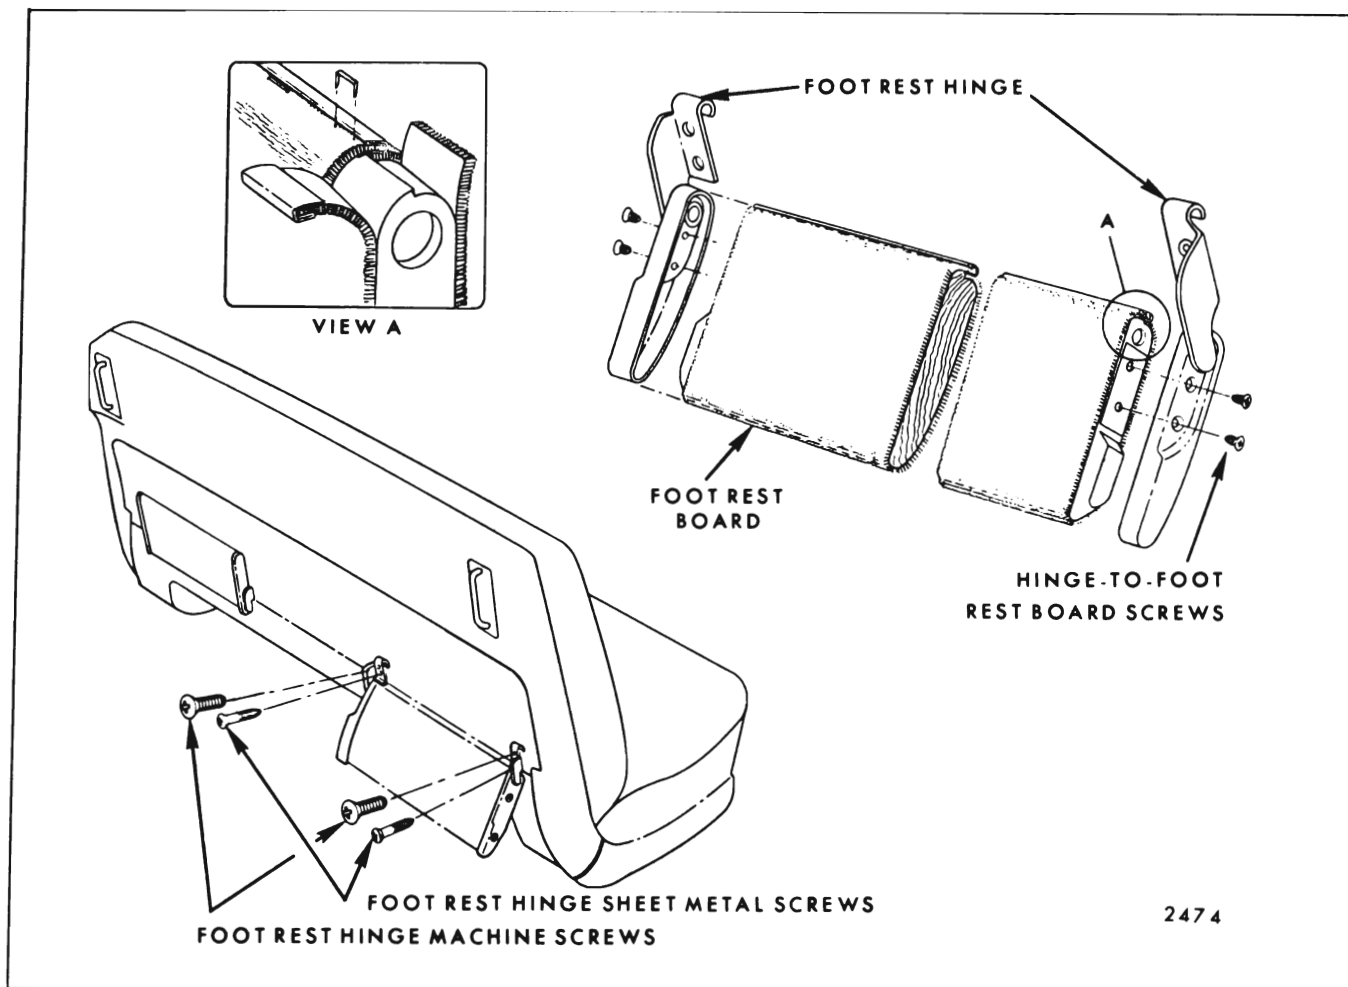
Foot Rest Installation - Cadillac 68169 Styles
